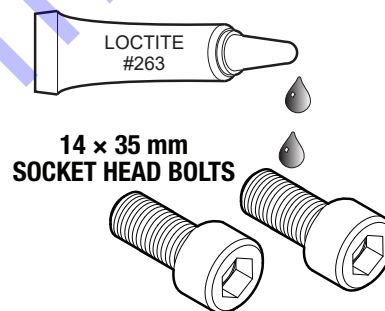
Applying Loctite® 263™ (Front Bumper Bolts)
